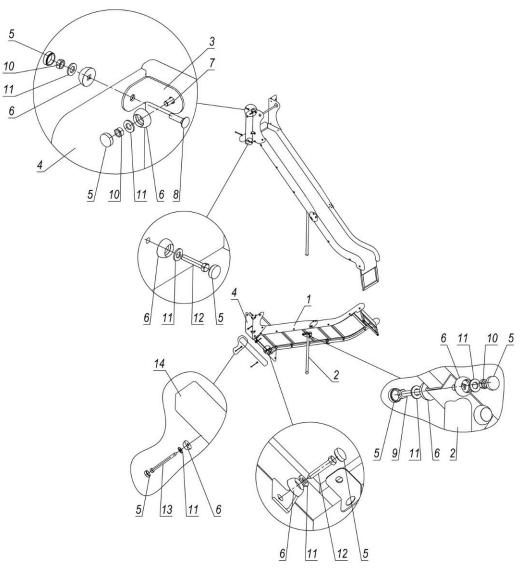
Install a 700 mm slide to the tower with two platforms 0.7-2 m (3.5 m beam) from the ground:
